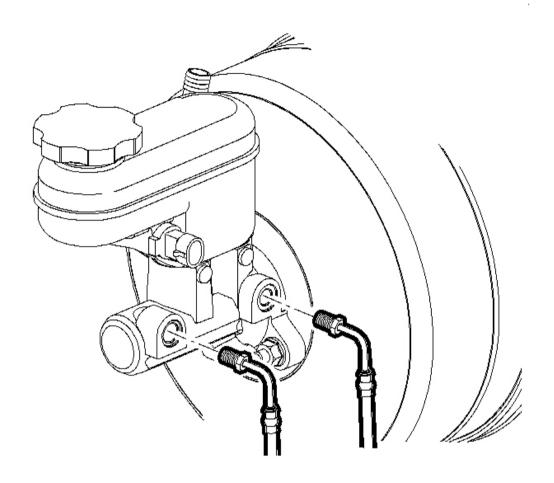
Disconnecting/Connecting Brake Pipes From Master Cylinder Courtesy of GENERAL MOTORS CORP.
